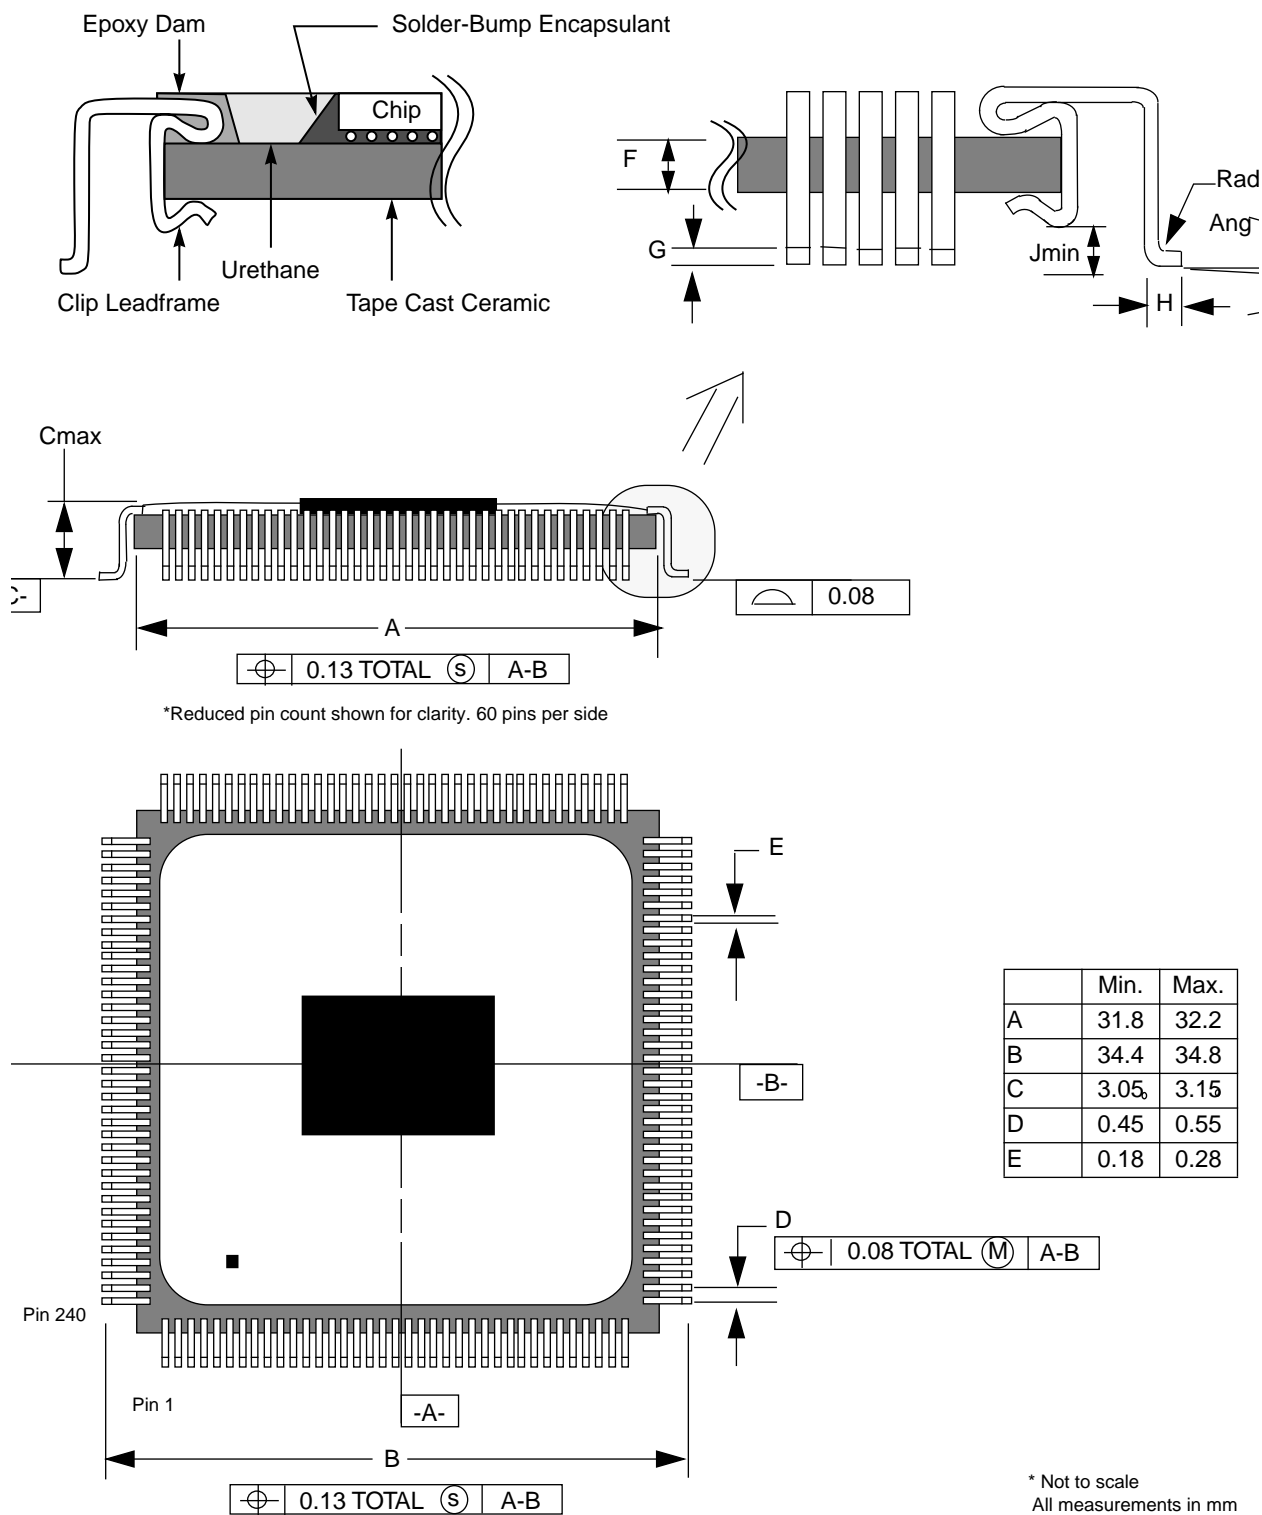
Mechanical Dimensions of the IBM C4-CQFP Package
